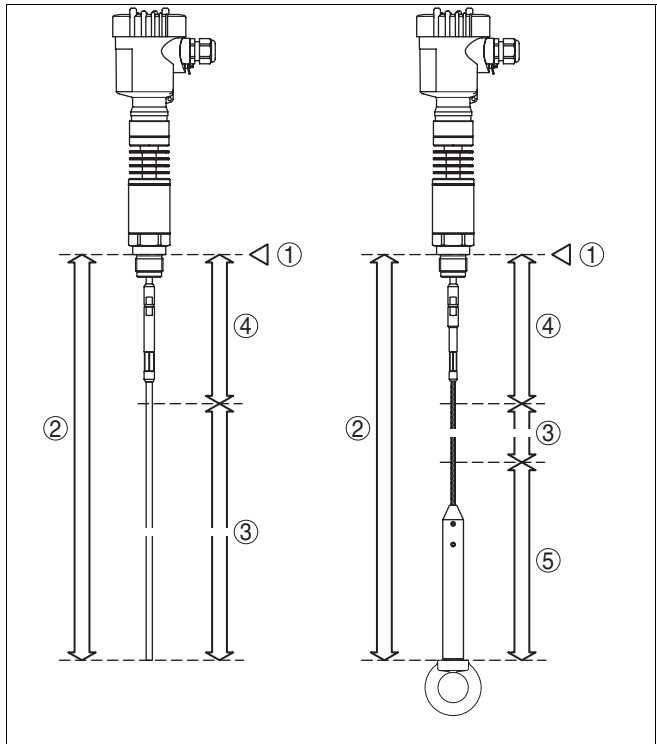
Measuring ranges of the KSR-GT 666 - rod and cable version
